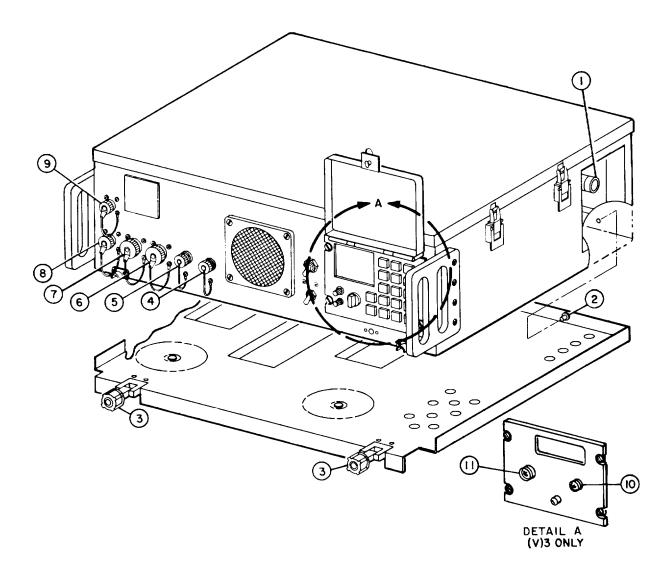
MX-10485/VRC-86 Electronics Box Mounting, Typical
